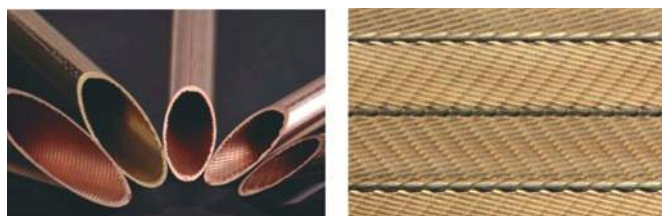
Inner grooved small diameter copper tube and example of enhanced inner tube surface herringbone pattern
